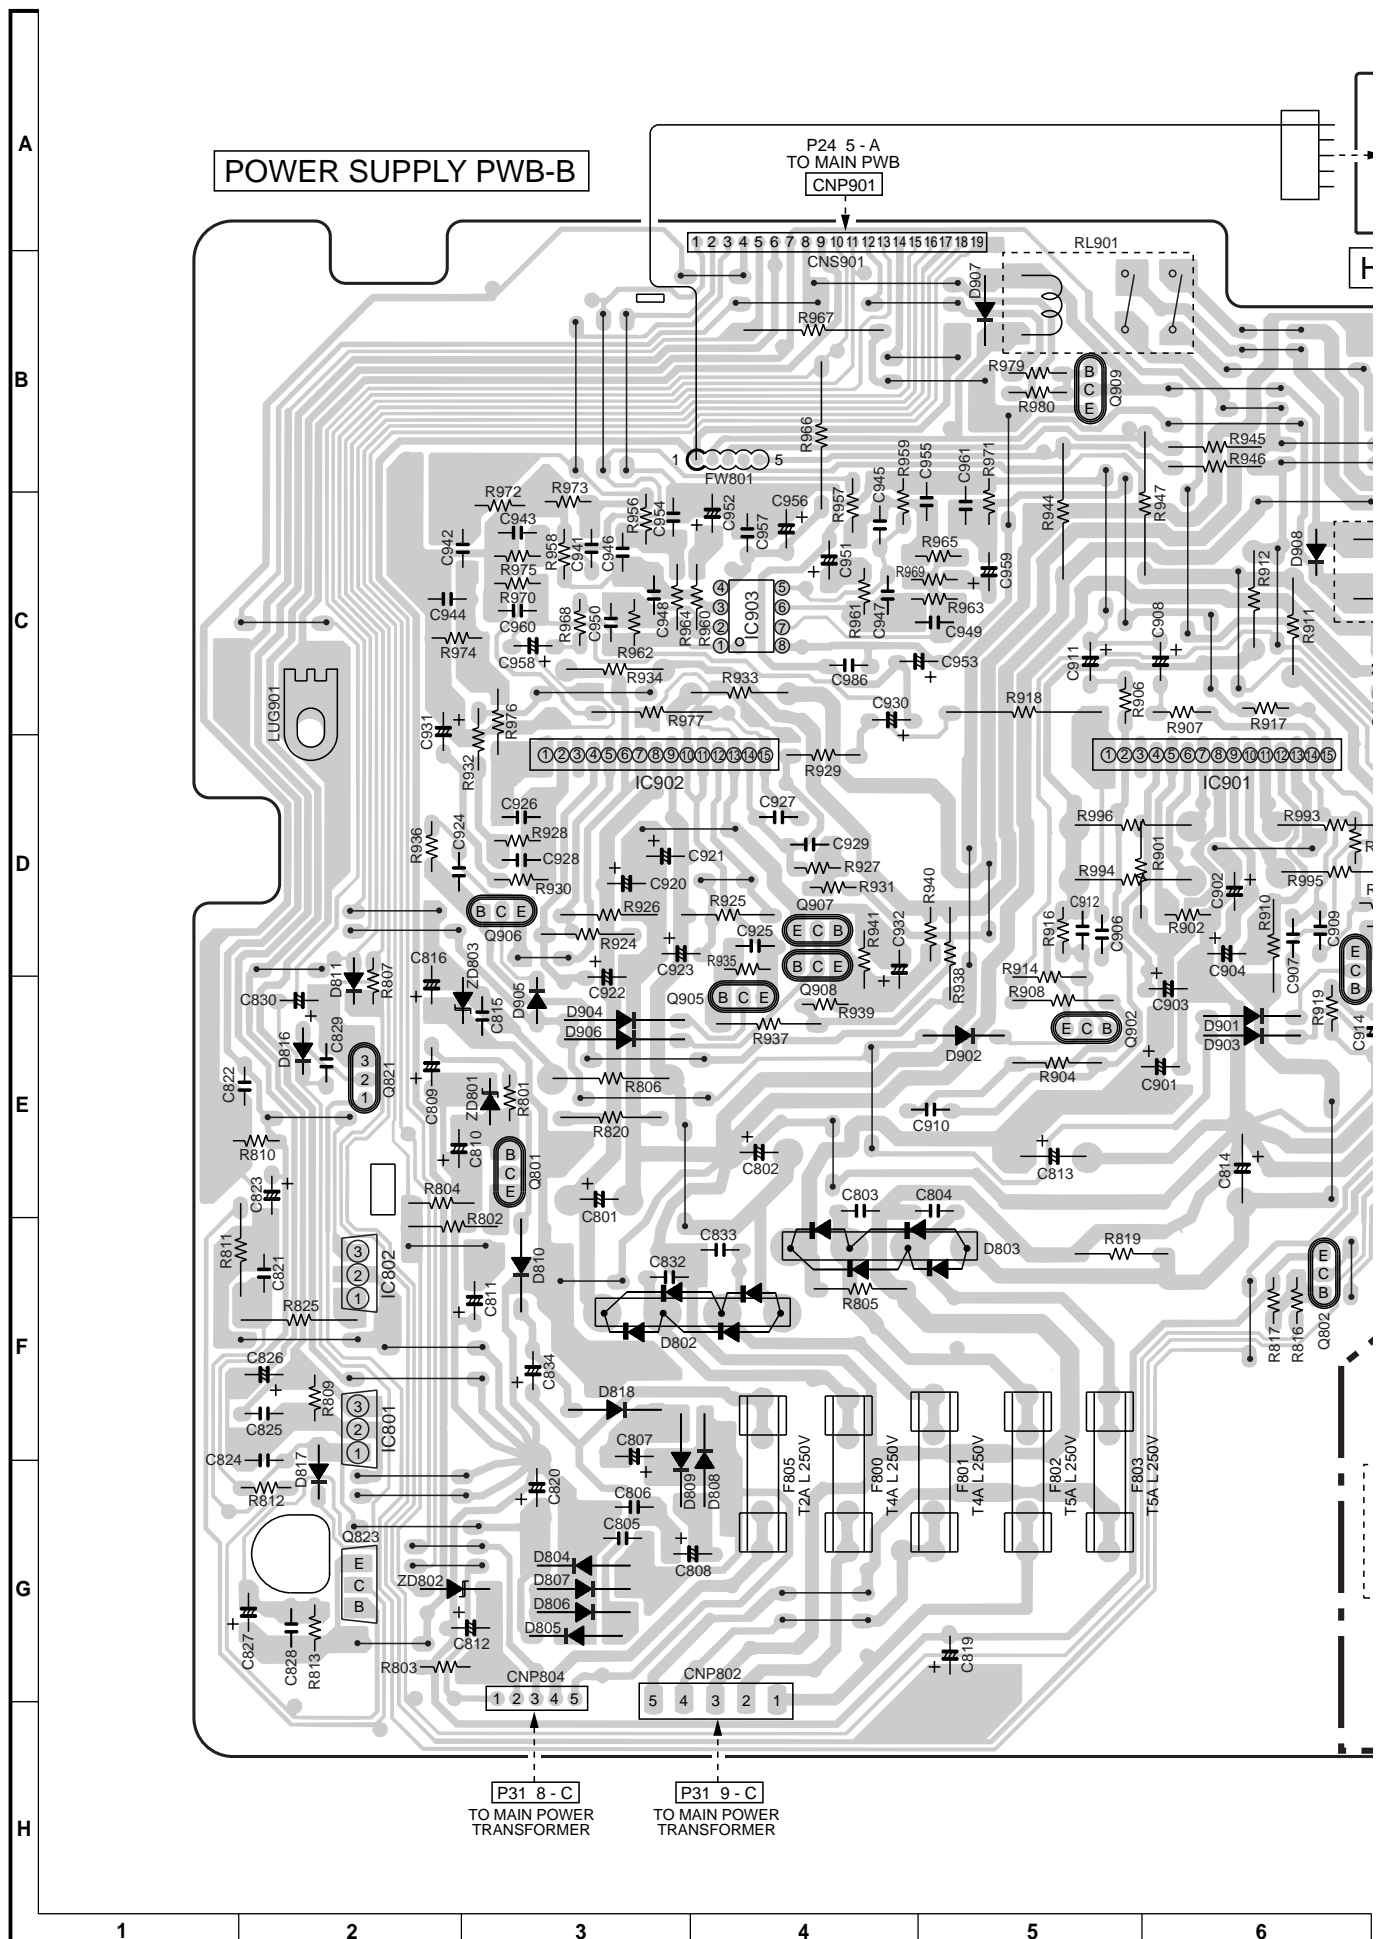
WIRING SIDE OF P.W.BOARD (5/8)
